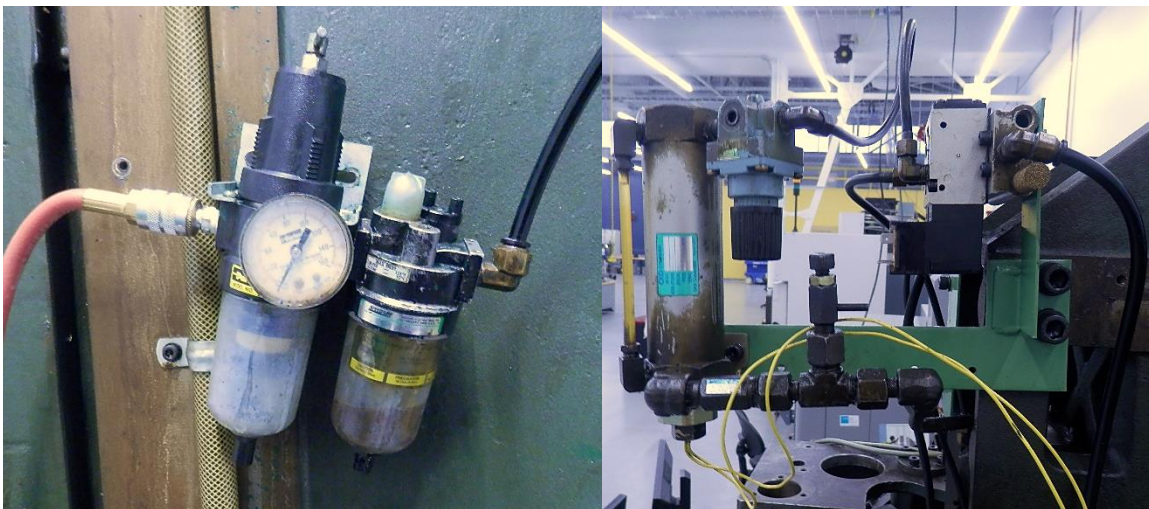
Pressure regulation valve and condensation catch (left), hydraulic oil and solenoid valves (right)
